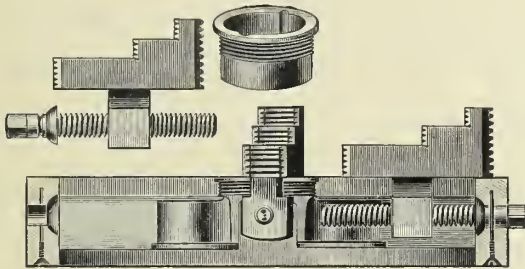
shows a section of the 12 inch Light Independent Lathe Chuck, the center hub removed, also one of the jaws and jaw screws removed with jaw reversed. It also shows the small screw pins which hold the jaw screws in place when the center hub is removed for reversing the jaws. These screw pins may be quickly removed, affording an excellent opportunity for oiling the long bearing of the jaw screws. Attention is called to the reversible jaw with solid nut, and to the heavy ways in which the jaws work.
